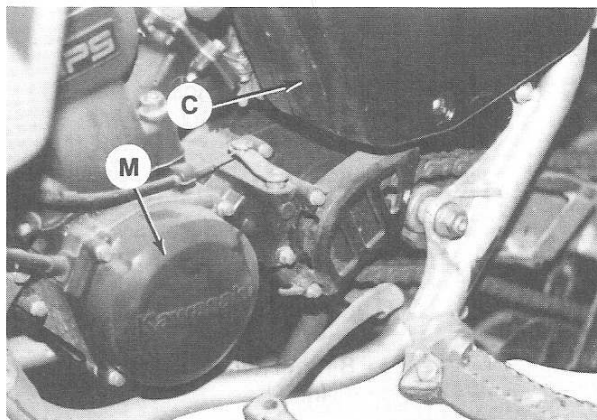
Remove four screws retaining cover (C) to expose air filter element. Remove four screws retaining magneto cover (M) to expose flywheel and magneto base plate components located behind flywheel.
